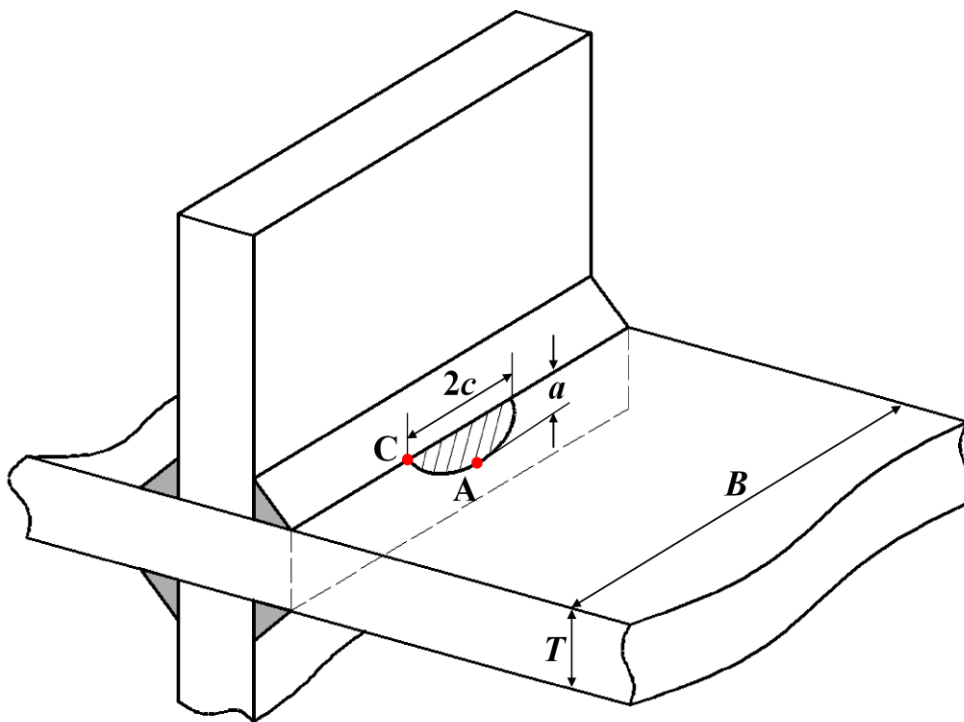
Surface crack at the weld toe of cruciform joint.
